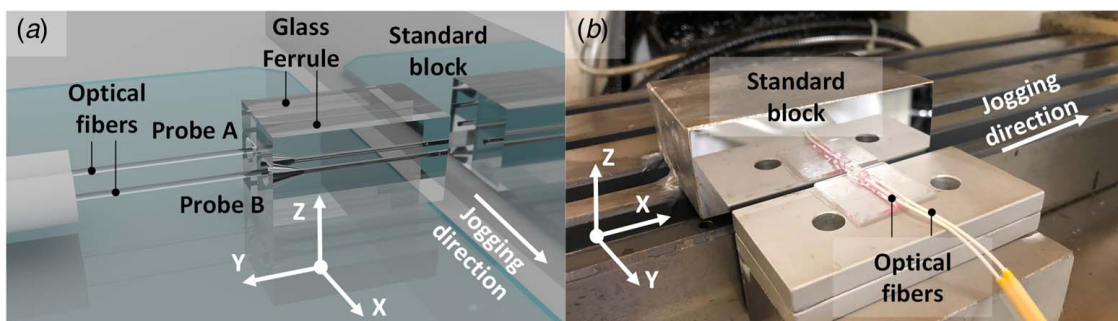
Setup for STP method. The standard block is mounted on the x-axis of the machine tool. Two optical fibers are mounted on the base of the machine tool using glass ferrules, serving as two probes (probes A & B). These two optical fibers can measure the surface of the standard block while the x-axis slide jogs toward x direction.
